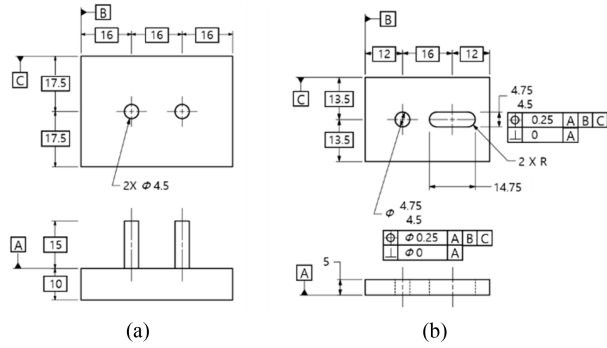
Drawings of the exactly constrained assembly design: (a) Part A, and (b) Part B. All numbers in [mm]
